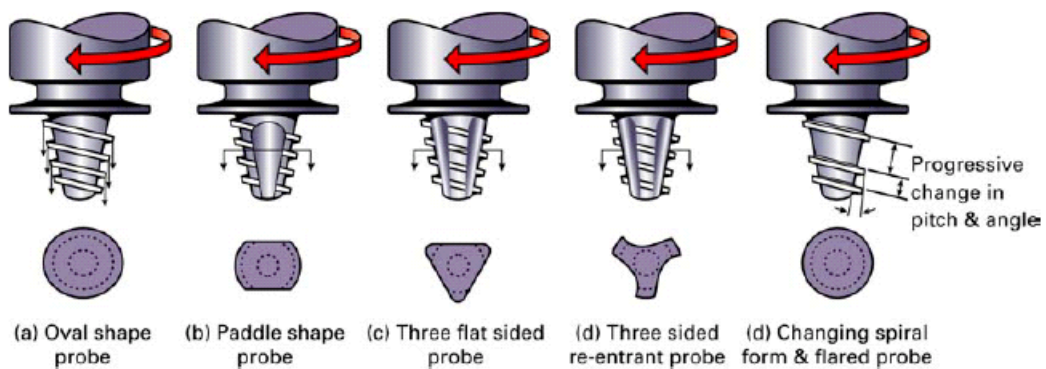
Some of the basic tool shapes for friction stir welding. © TWI.
